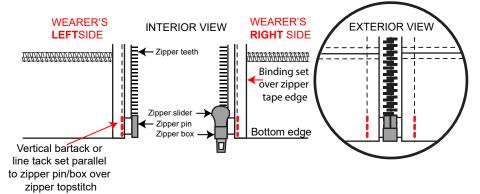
SEPARATING ZIPPER - REINFORCEMENT
